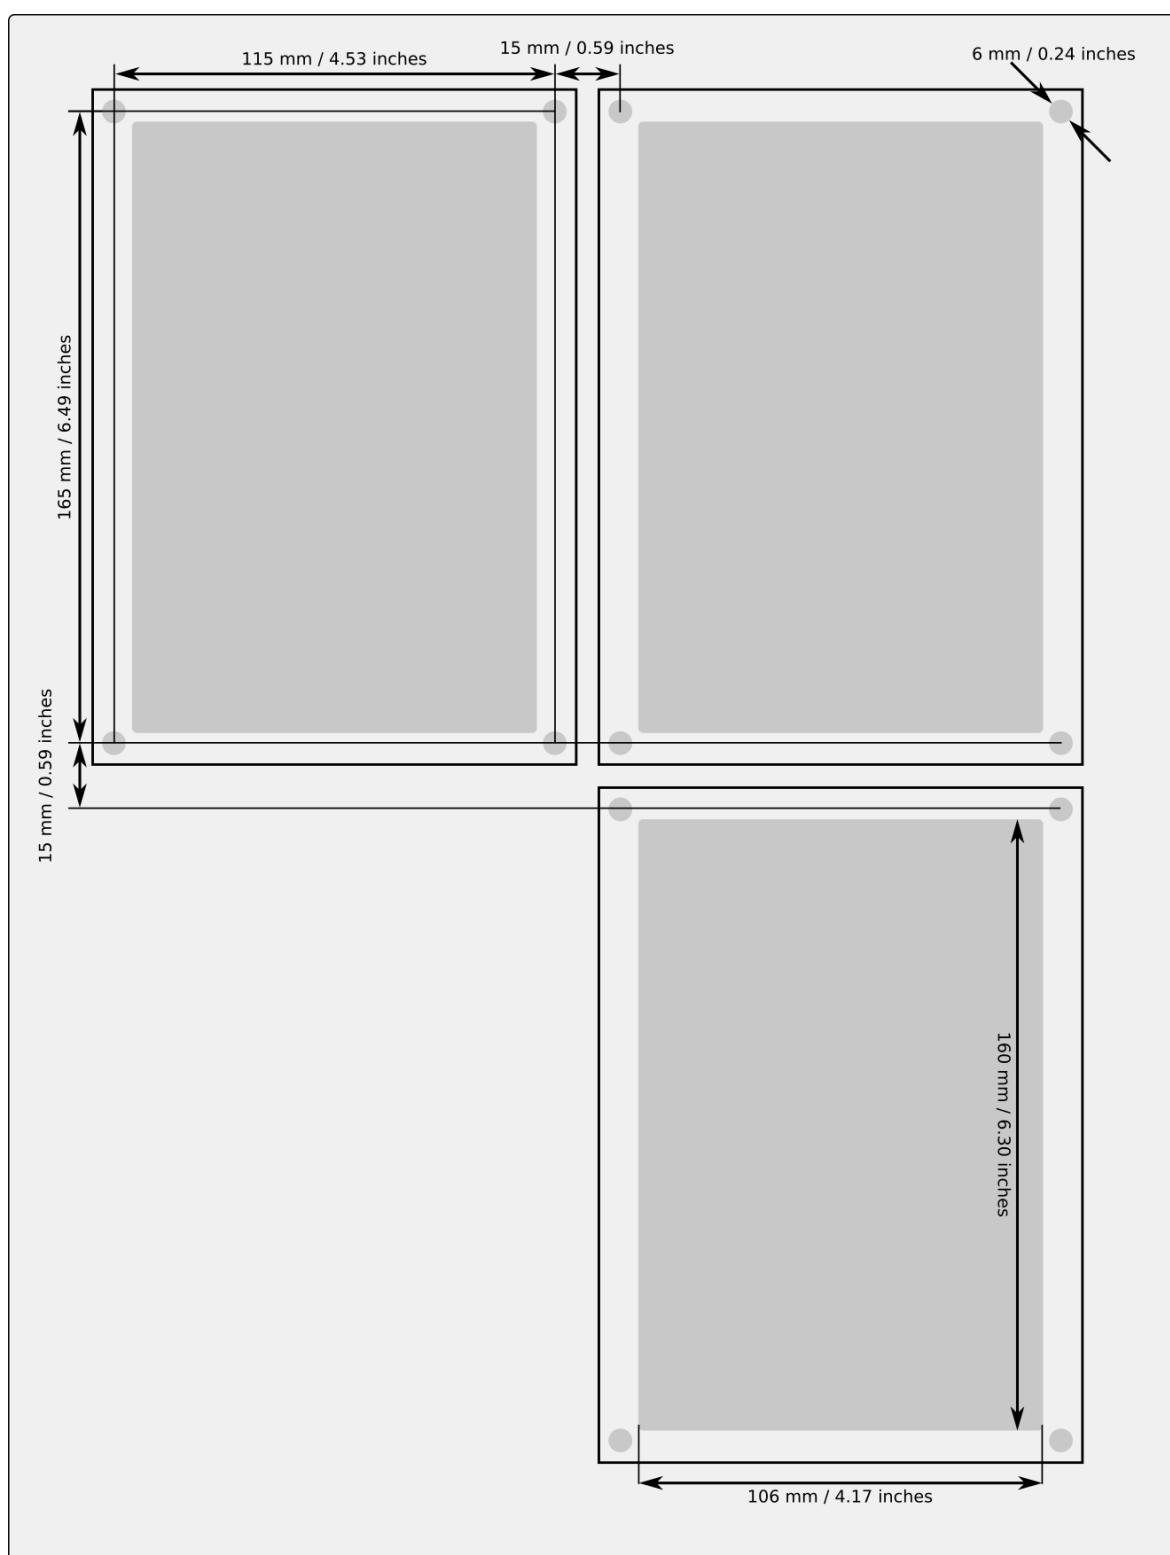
73. Panel cutout dimensions and device spacing.
